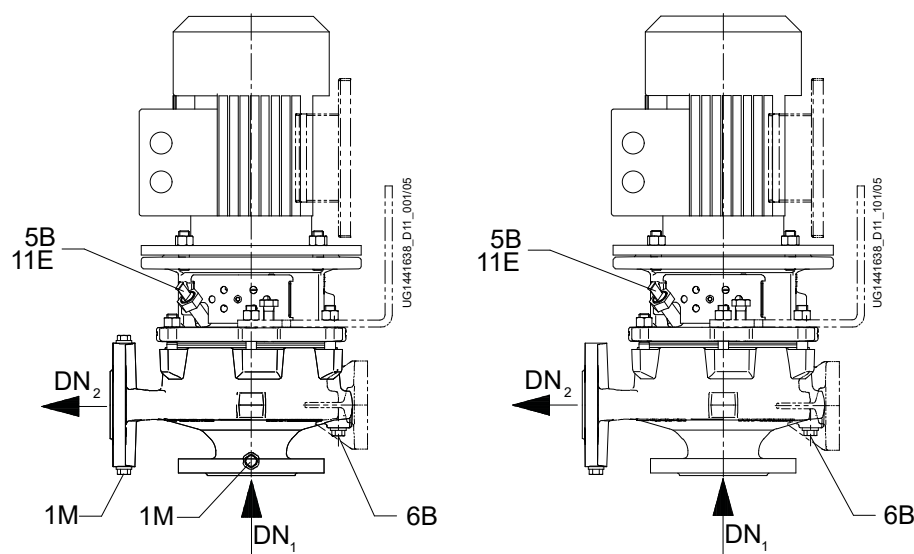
Left: Version with pressure gage connection; right: Version without pressure gage connection
